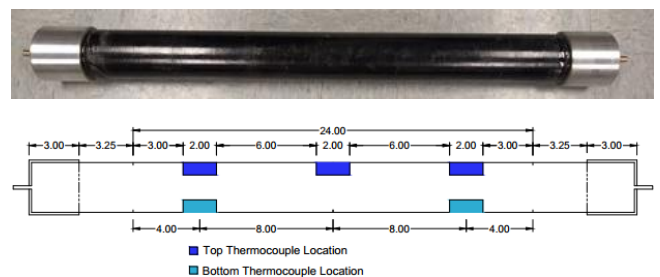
CFRP pipe for IRT testing (top), sketch showing thermocouple locations (bottom)
